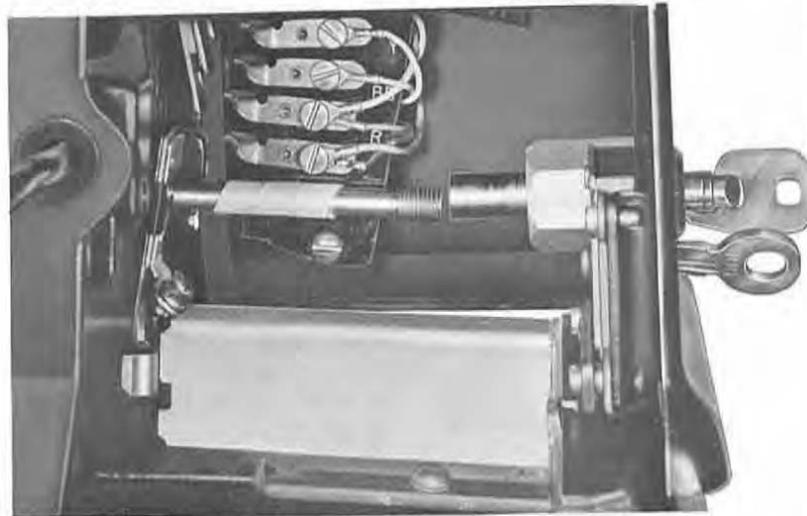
Cutaway Section of Upper Housing Showing Mating of Bolt Fastener and KS-19277 Lock with Housing Placed on Coin Collector
